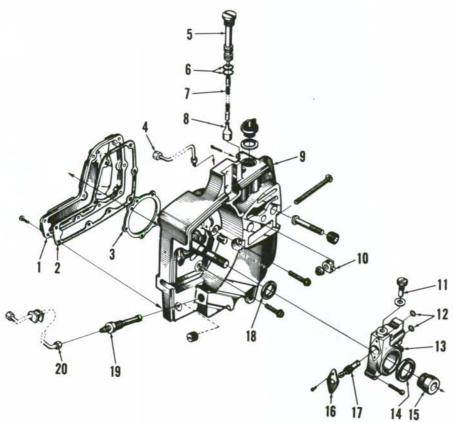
Exploded view of automatic chain oil pump on models so equipped.
